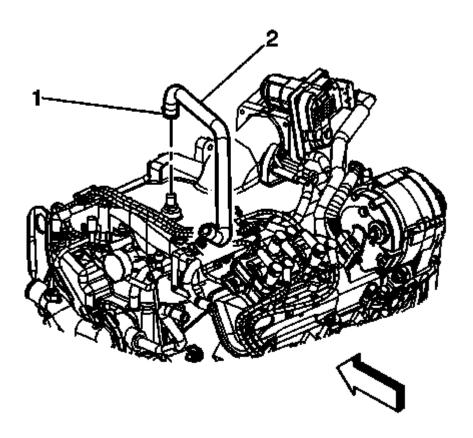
View Of Brake Booster Vacuum Hose Courtesy of GENERAL MOTORS COMPANY
